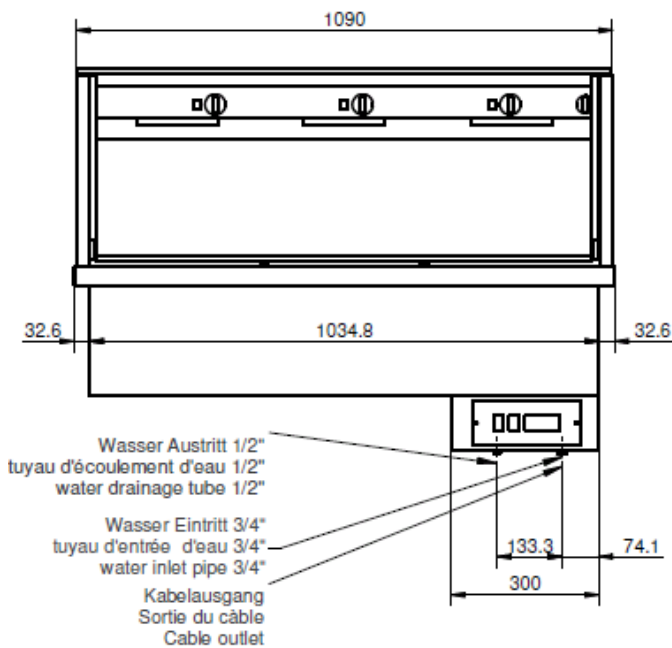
Technical view with GN 3/1 dimensions (front view)
